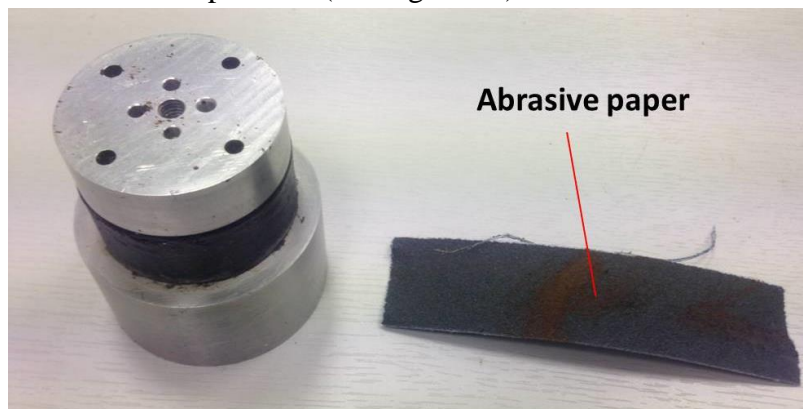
Modify the surface and edge of the pitch tool with hot mould and abrasive paper
